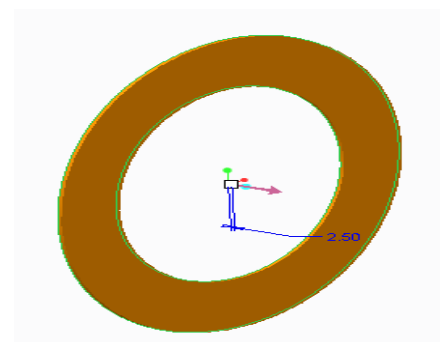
Thickness of 2.5mm is added to centrifugal fan-impeller
